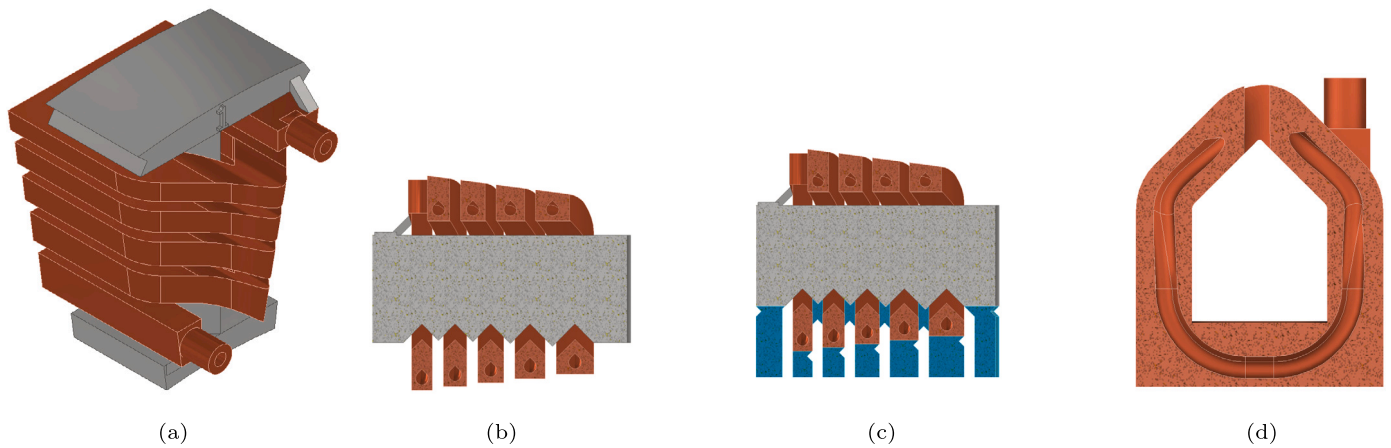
Design of MM coils; final CAD-Design (a); cross section (b); support structure (c); path of the cooling channel (d).
